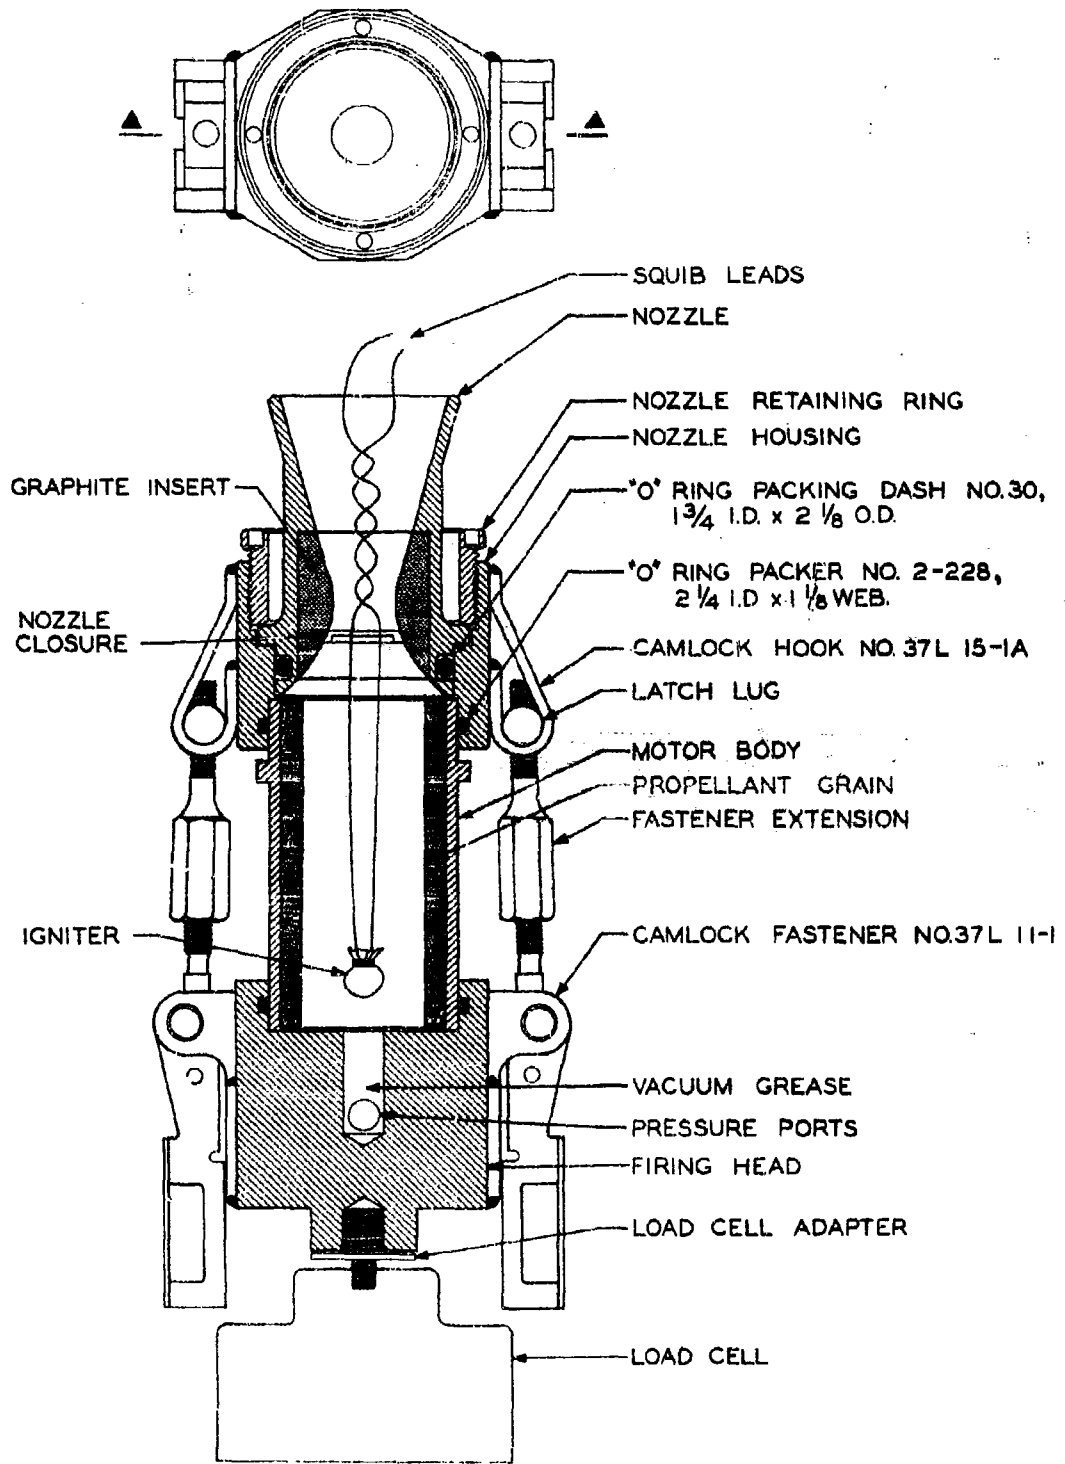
Clamp-type 2CI 5-4 motor firing assembly.
